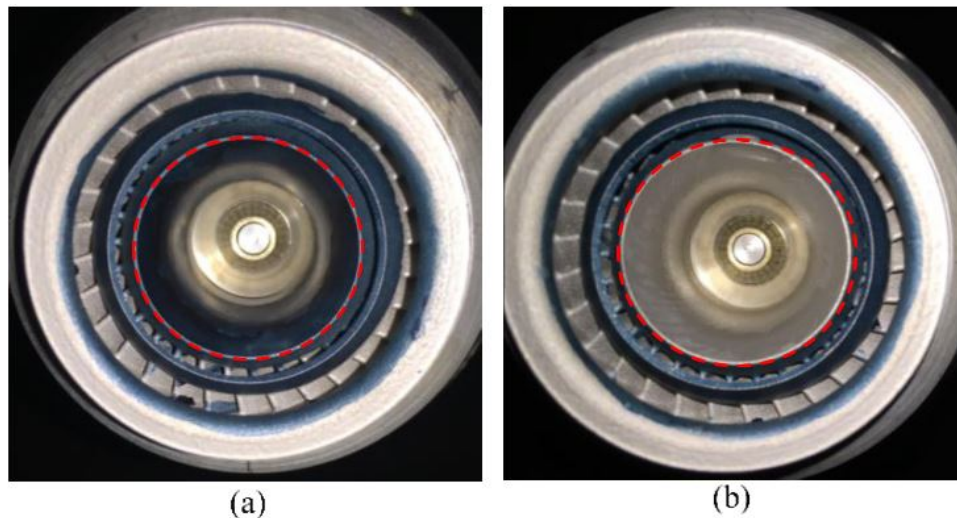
Inner surface impinging test using methanol. (a) Machining blue paint applied on inner surface of the swirler assembly. (b) Removal of machining blue paint after flowing methanol through the pilot injector.
